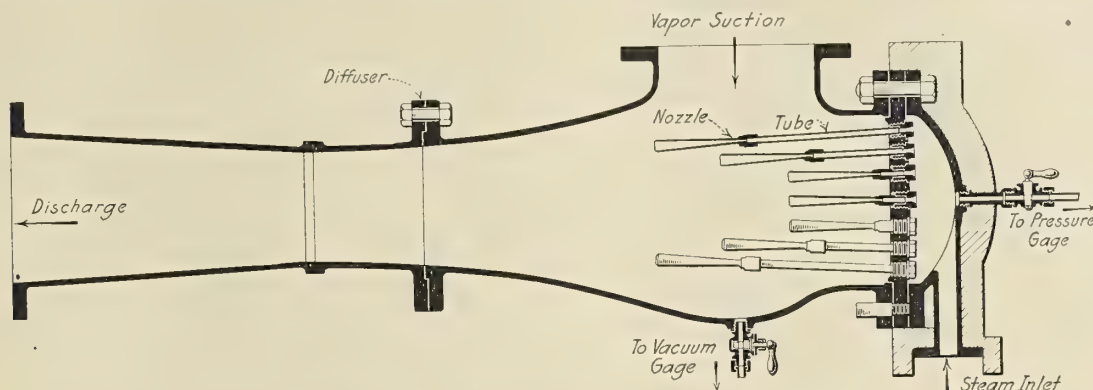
Section of Westinghouse-Leblanc Steam Ejector
